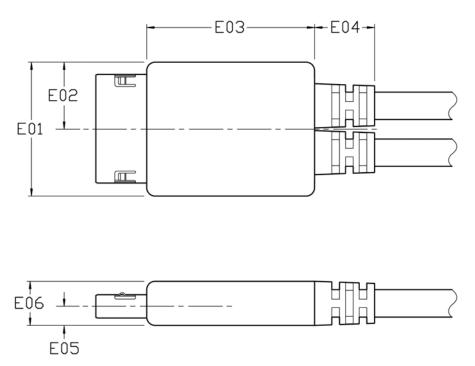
FREE EXTERNAL CABLE ASSEMBLY
